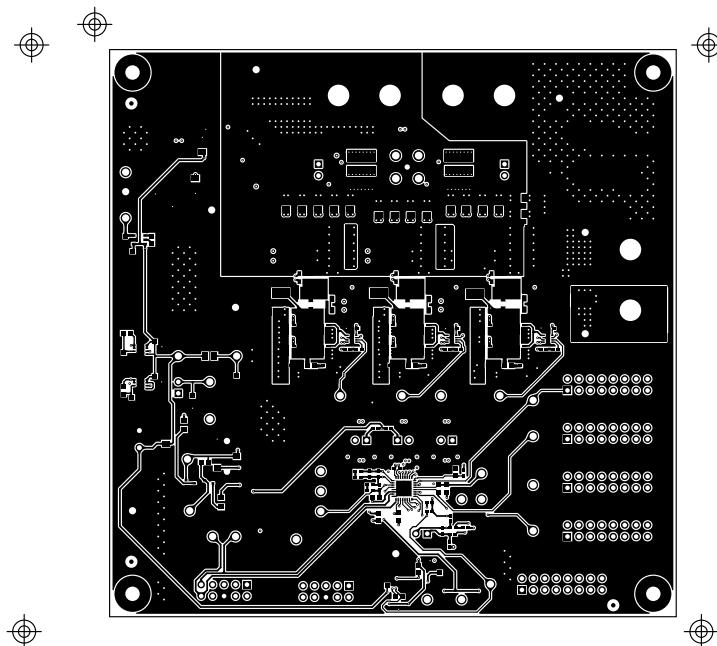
TPS59632Q1EVM-057 PCB Top Layer
